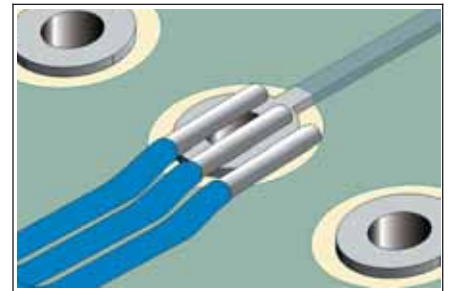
Not Recommended Multiple wires soldered to pad overhanging pad edge.
